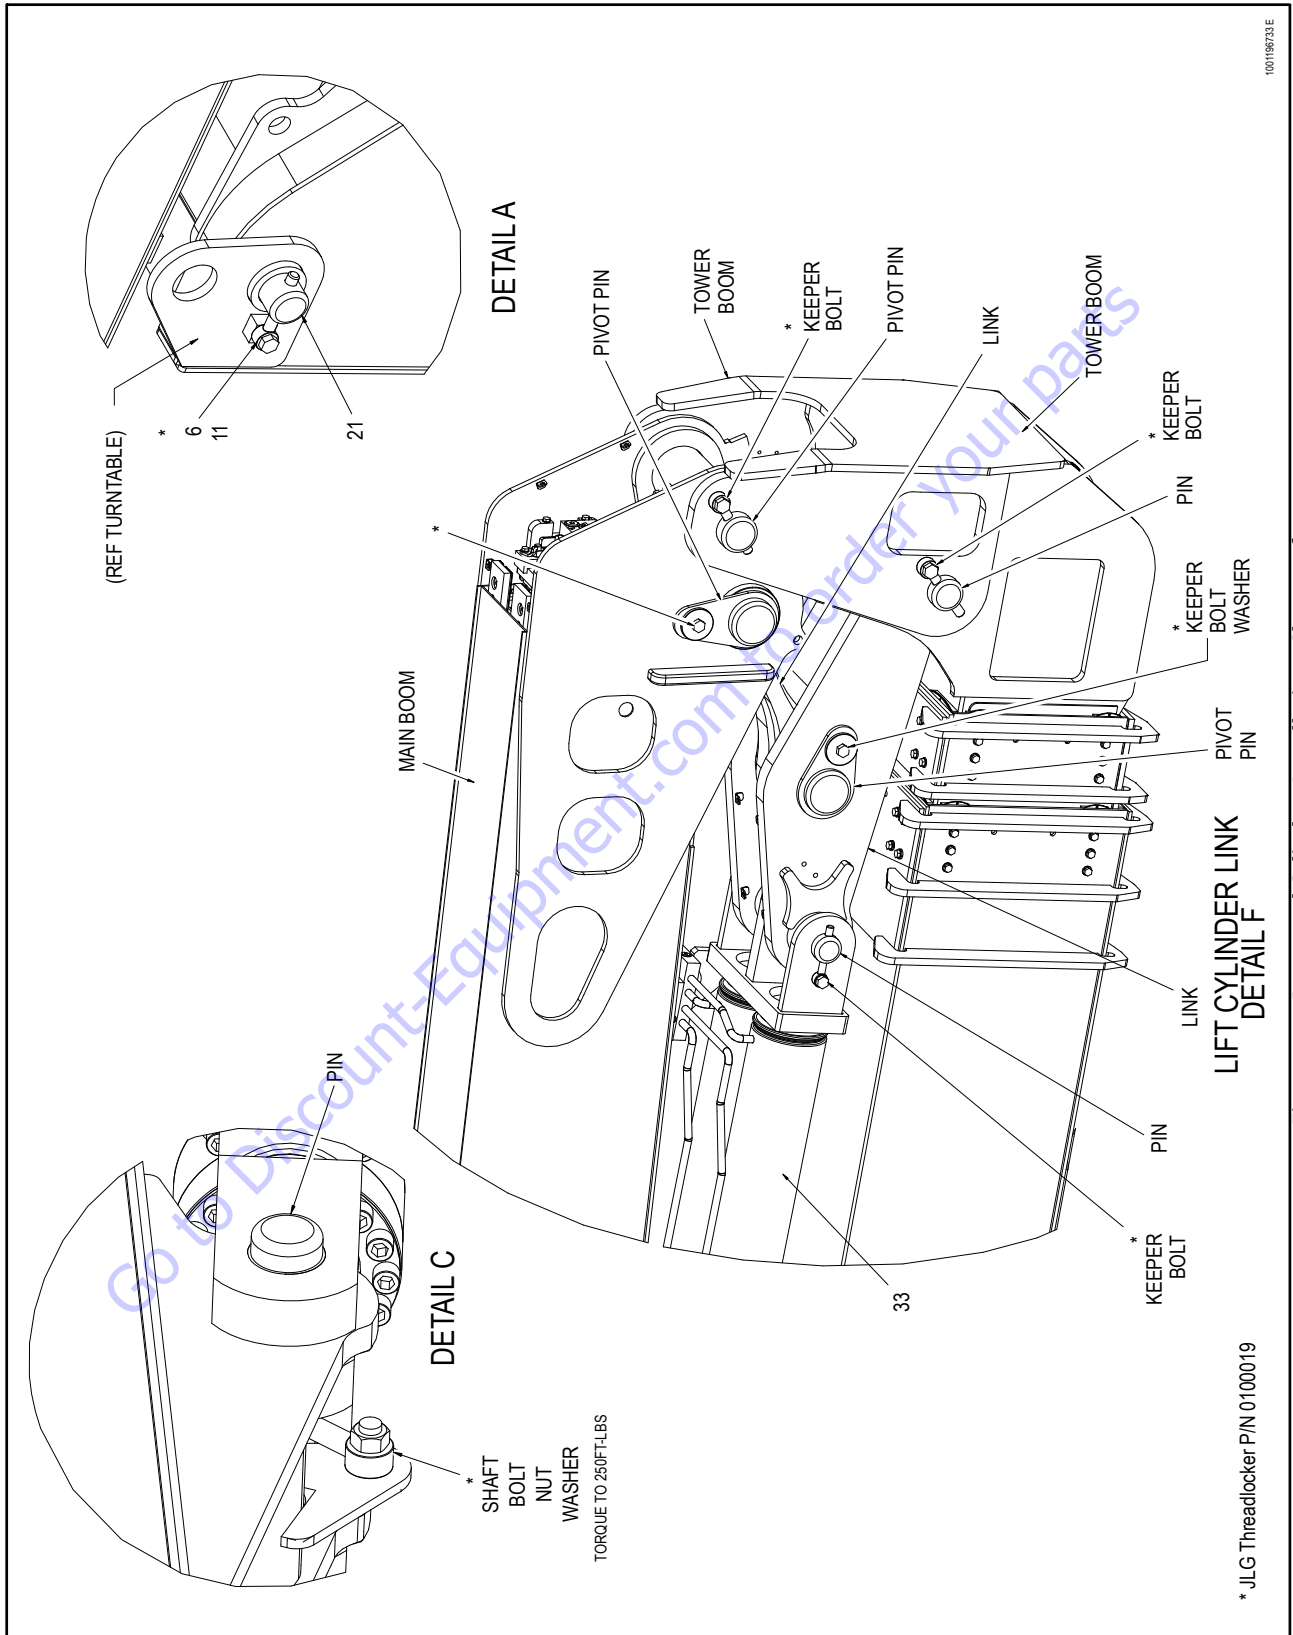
Boom and Cylinders Installation - Sheet 4 of 4
